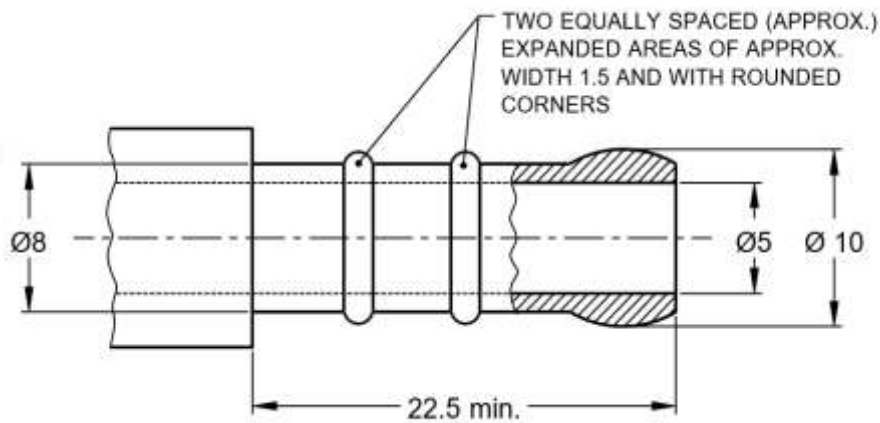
REFERENCE FIGURE FOR SHAPE OF NOZZLE
